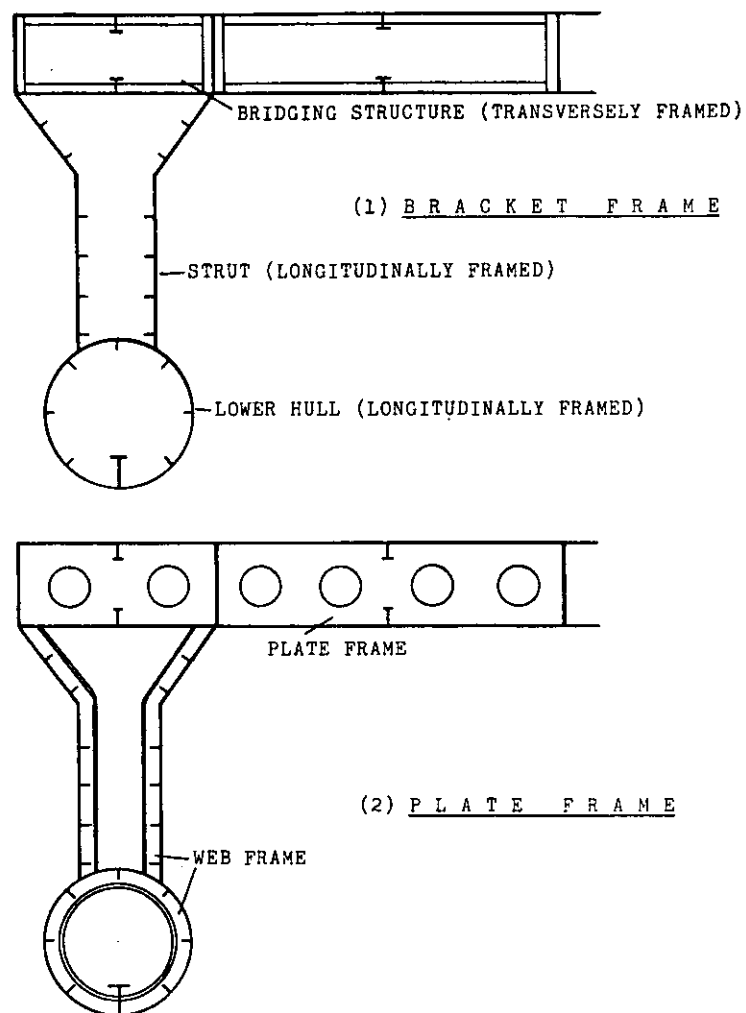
'STRUDES' arrangement (steel or aluminium alloy)
